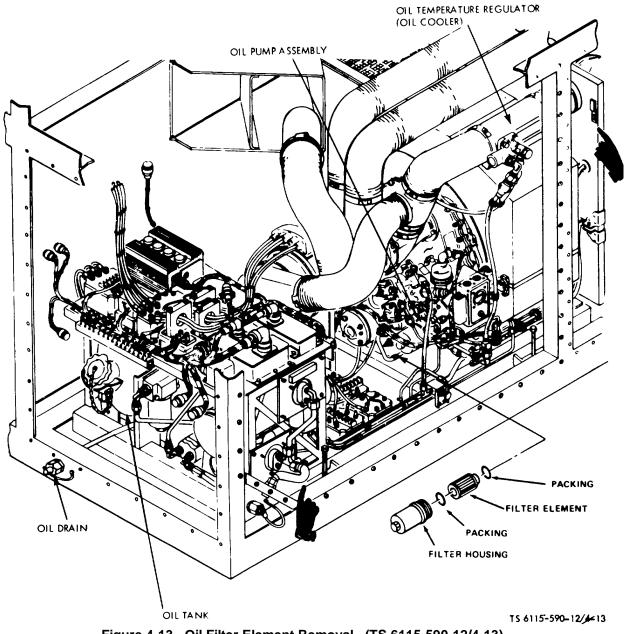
Oil Filter Element Removal. (TS 6115-590-12/4-13).
